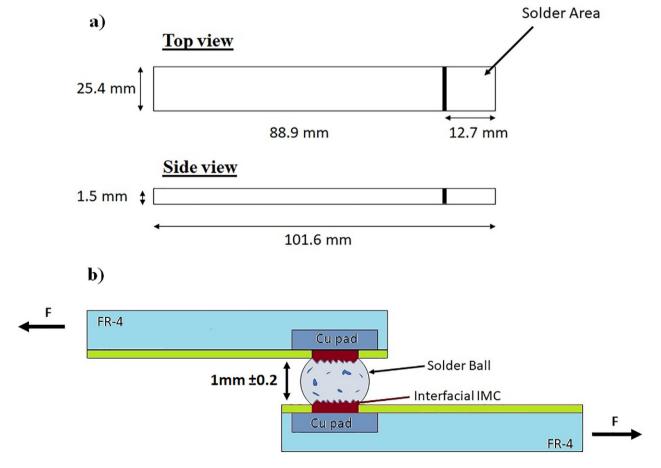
(a) Specifications of the shear test specimen and (b) Schematic drawing of the solder joints shear test.
